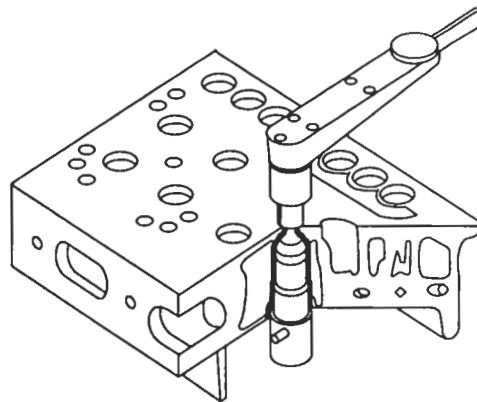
Upsetting Injector Tube with Tools J 5286-4C and J 5286-6
